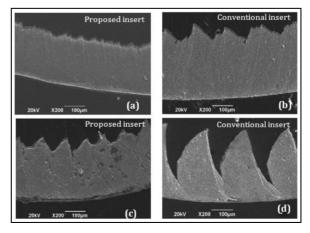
Chip morphology (Workpiece material: Inconel 718):
